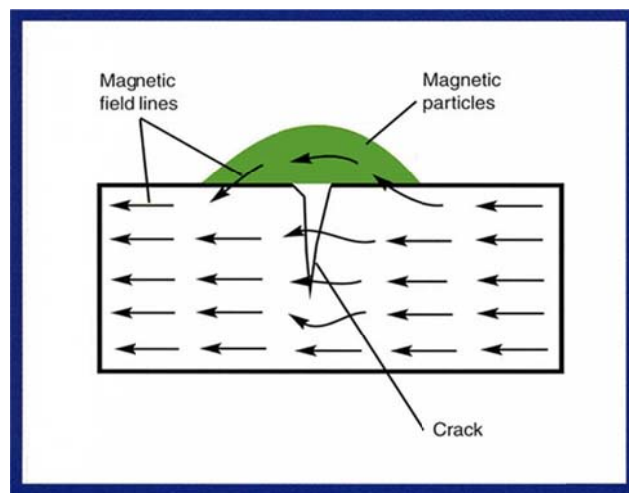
Magnetic particle testing of a surface crack [57].
